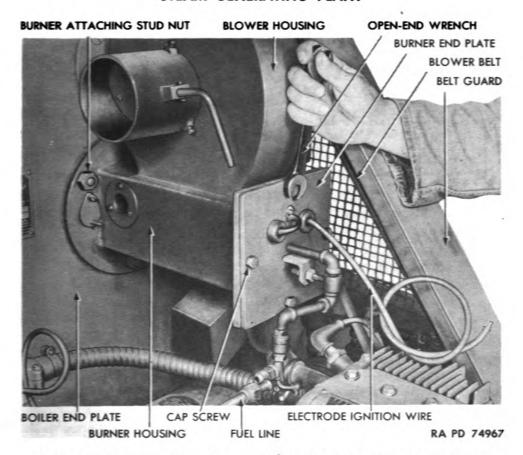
Removing Steam Generating Plant Burner End Cap Assembly
